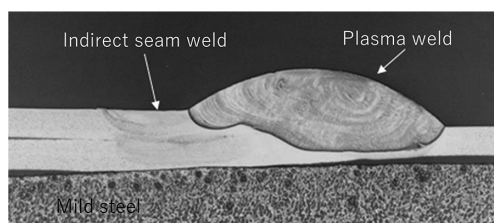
Equipment for automatic combined welding^{4,5)}Fig. 9 Cross section of weld bead⁴⁾Fig. 10 Appearance of weld bead after electrolytic polishing
